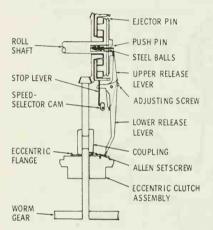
The driving mechanism of a rotary ironer with an automatically operating shoe.
